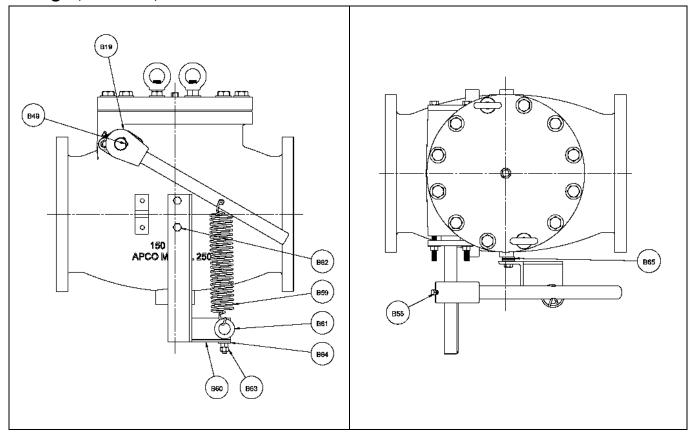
CVS-250/250A Swing Check Valve (Lever & Spring)
